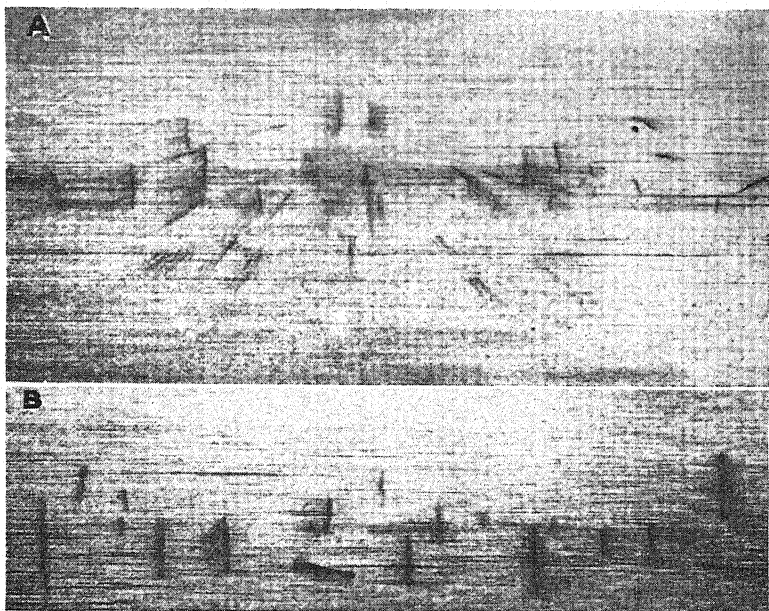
Shatter cracks in a new rail. A = horizontal longitudinal section; B = vertical longitudinal section. Natural size. (Quick.⁽⁵⁵⁹⁾)
